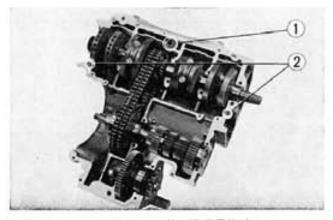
① Oil pass collar & "O" ring ② Dowel pins
